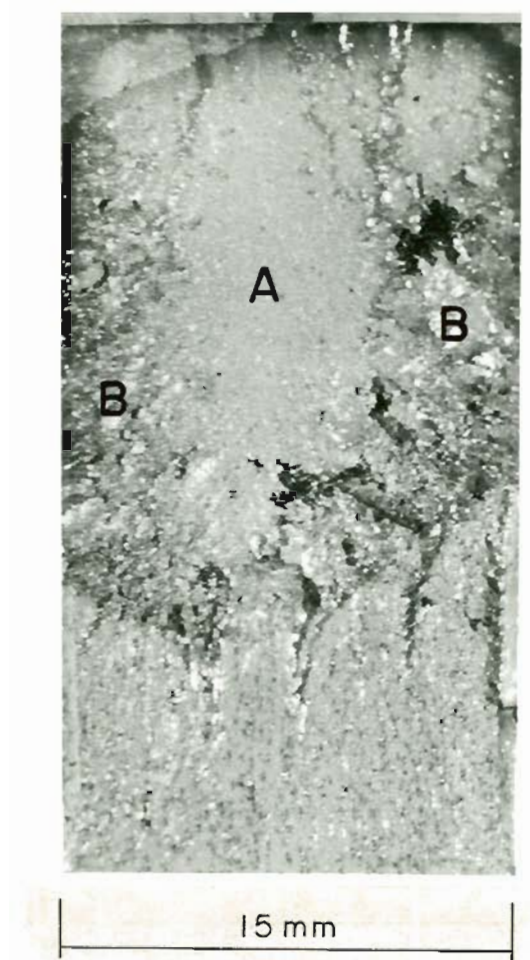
Fracture surface of a Compact Tension specimen austenitised at 870°C to obtain grain size of 0.025mm.
